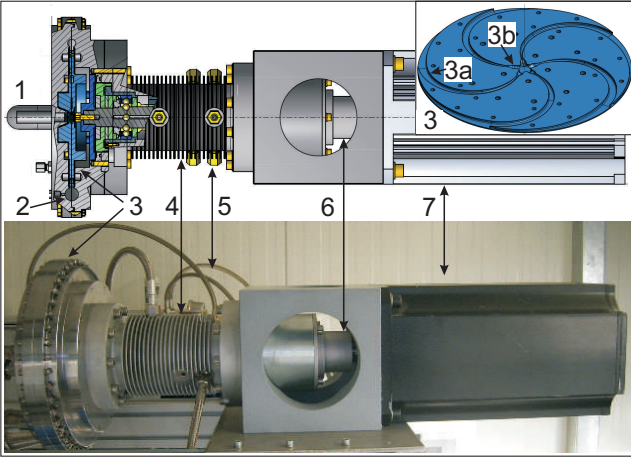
Centrifugal radial turbine with two angular ball bearings and a magnetic coupling to the generator: (1) axial steam inlet; (2) steam outlet; (3) blade wheel; (3a) blade channel; (3b) laval nozzle; (4) shaft bearing; (5) cooling and lubrication cycle; (6) magnetic coupling; (7) generator.
